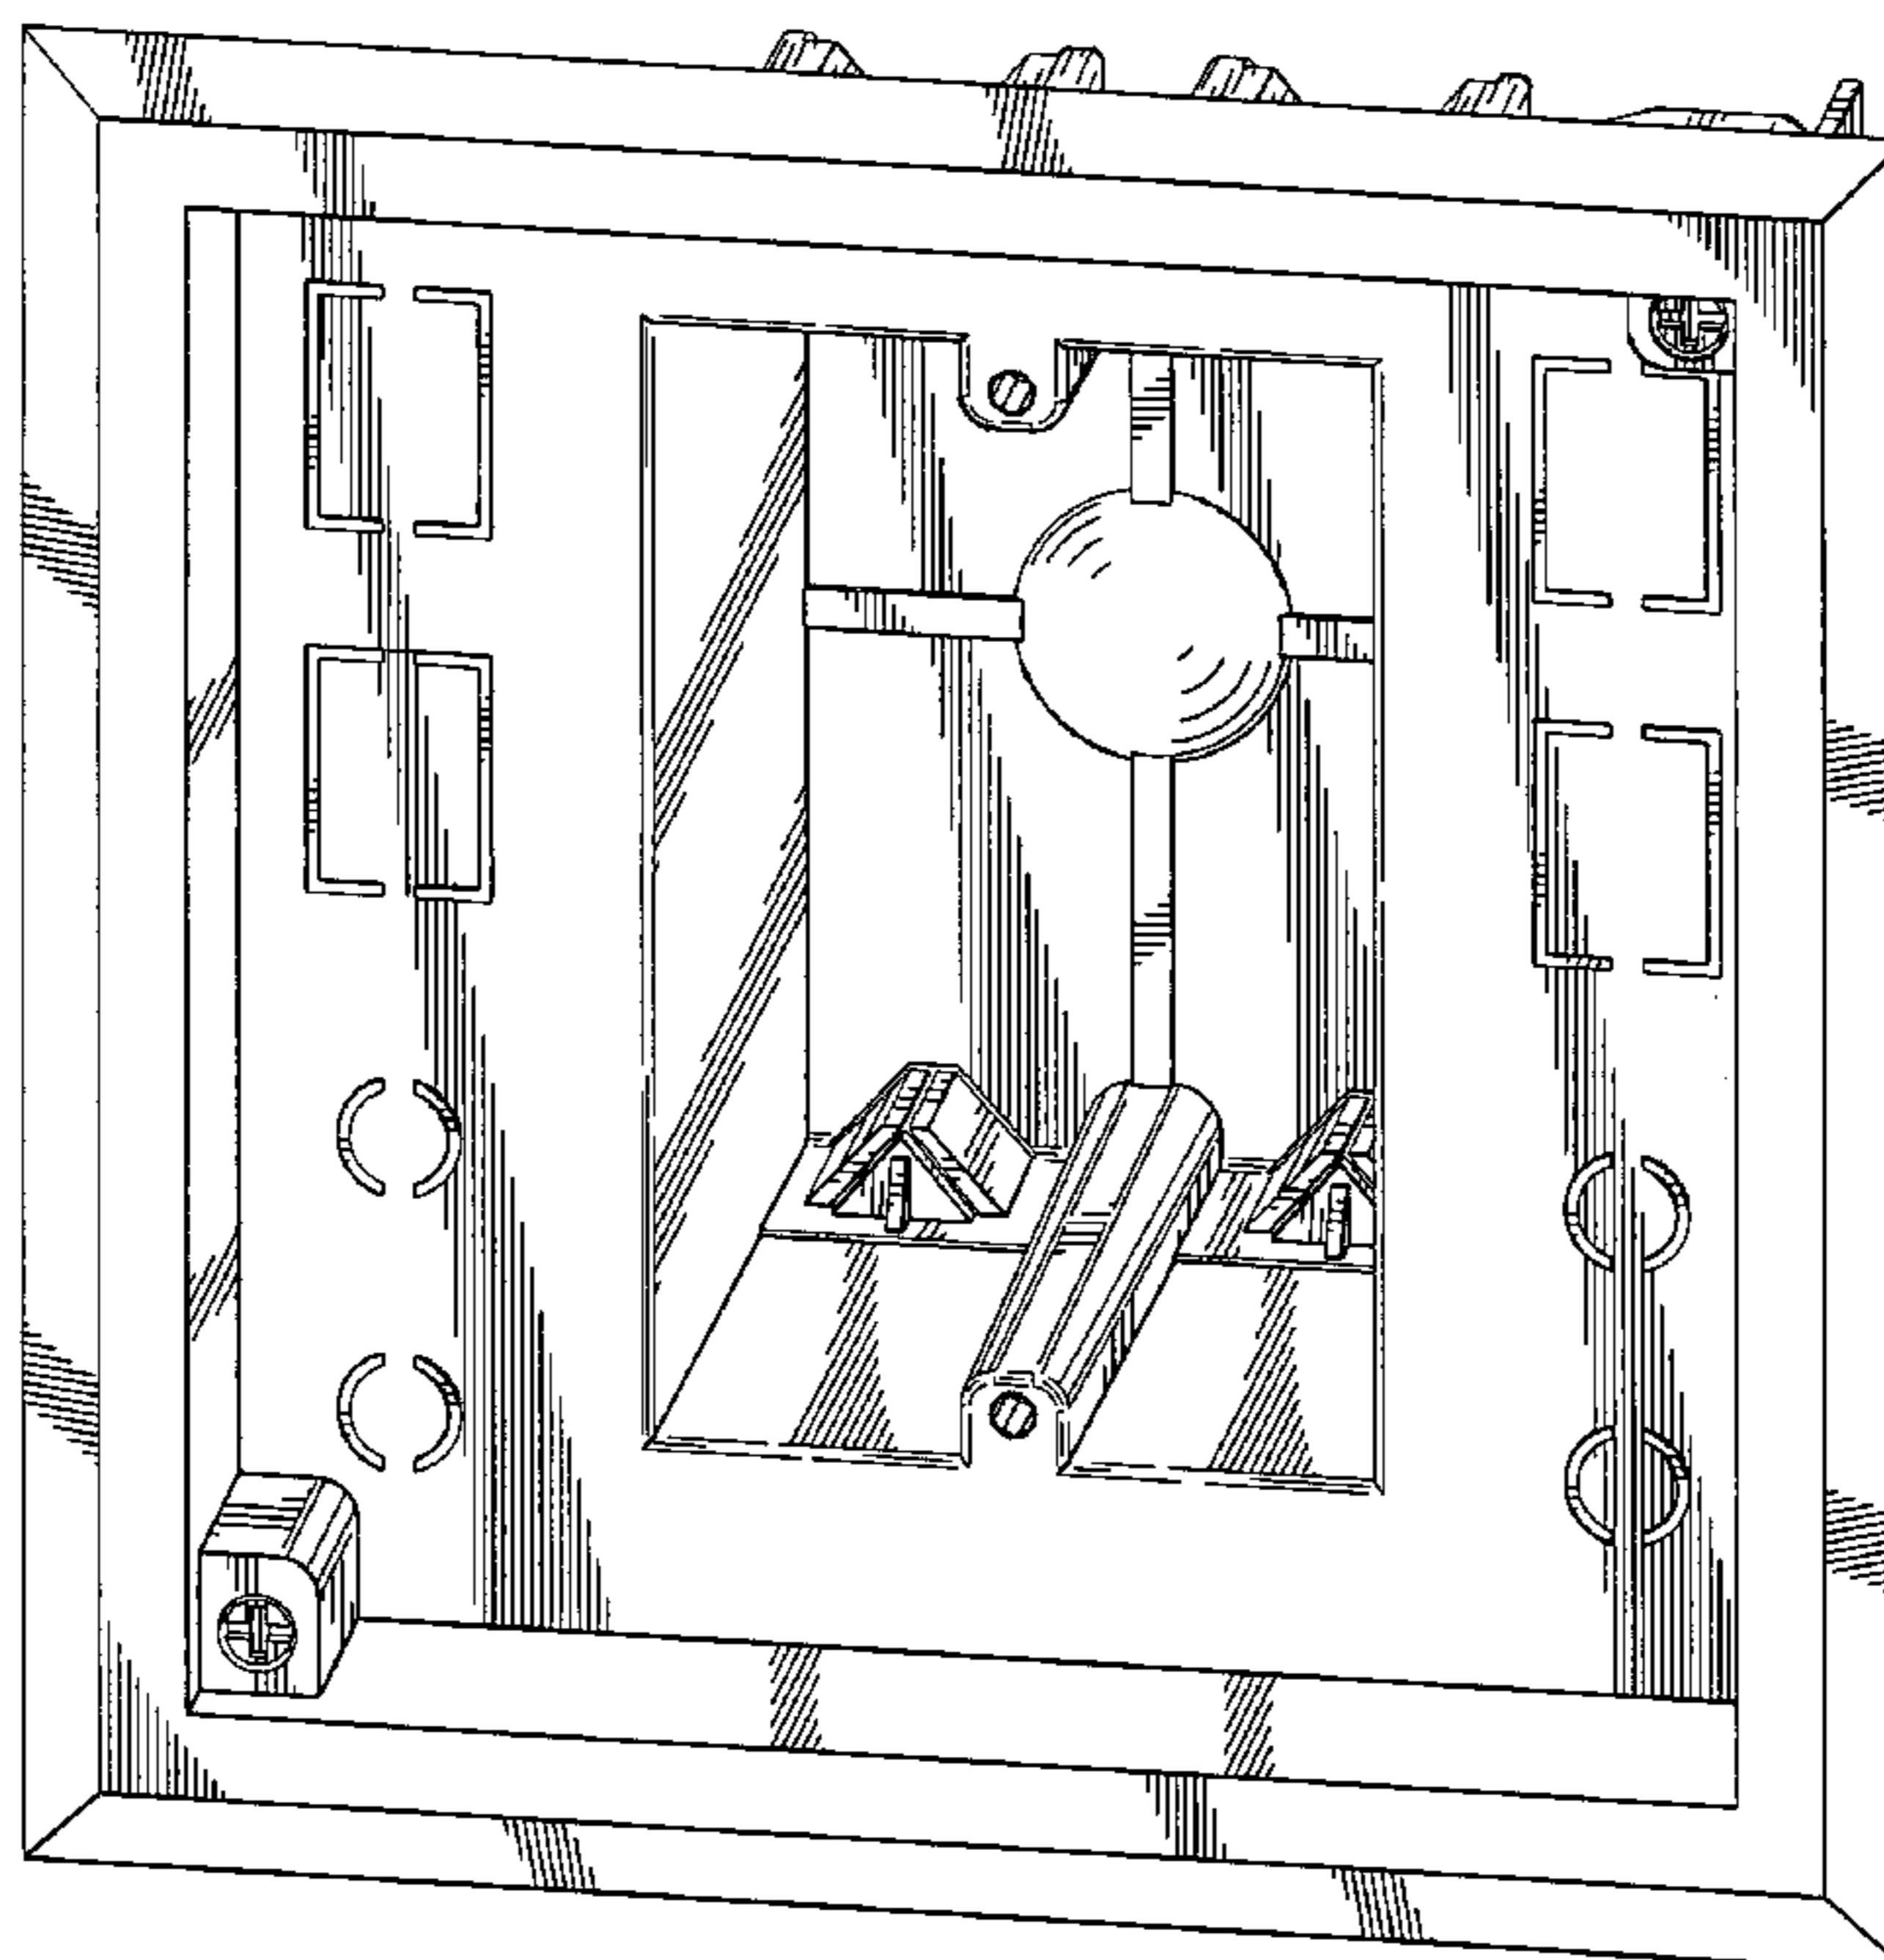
is a rear elevation view of the assembly of FIG. 1;
